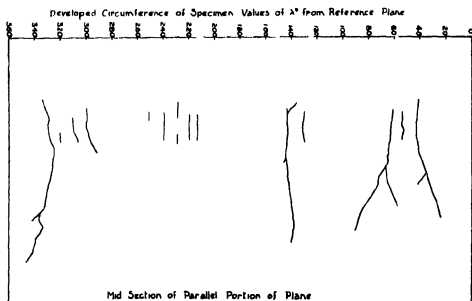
Developed Surface of a Specimen showing Positions and Shapes of Cracks
